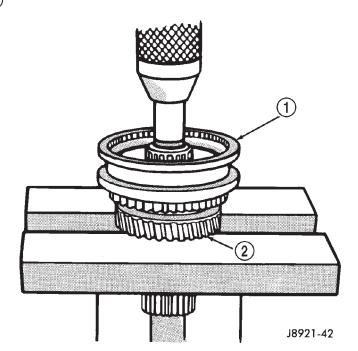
Remove 3-4 Synchronizer And Third Gear
